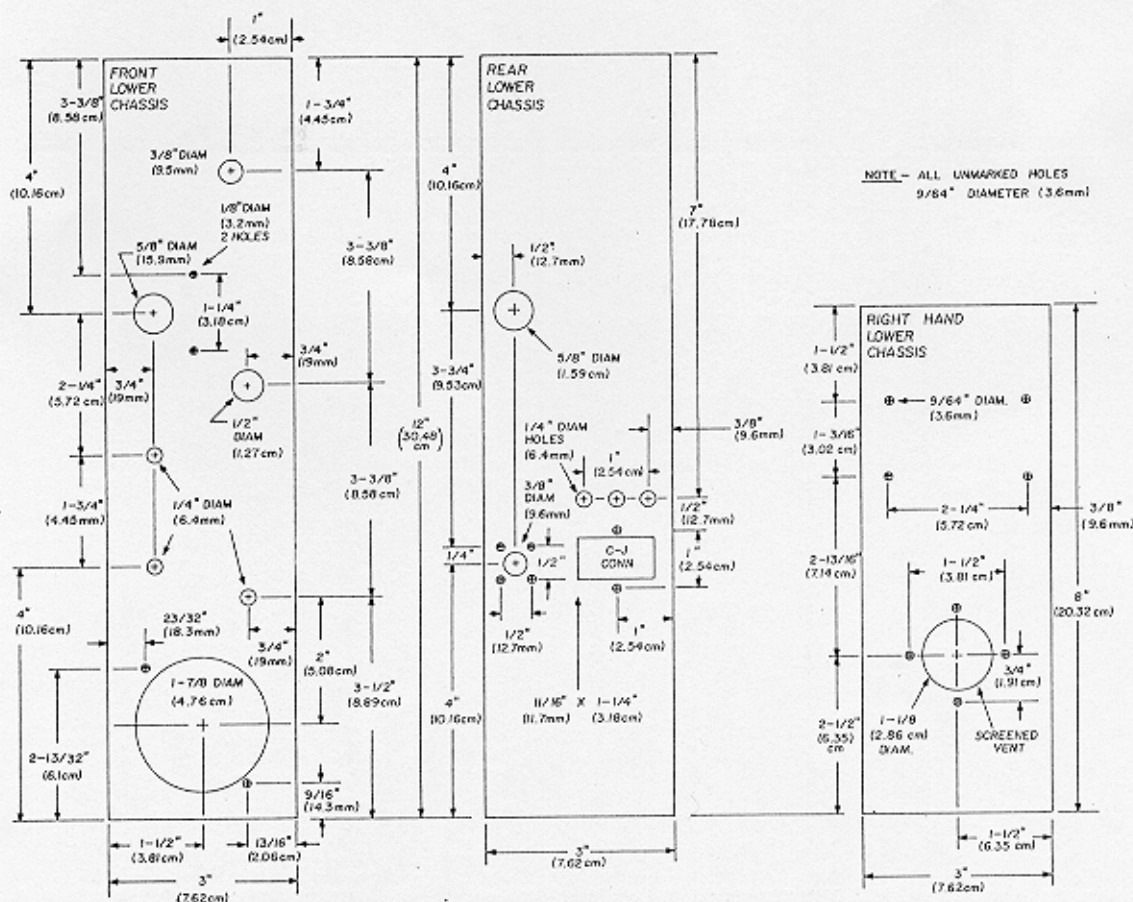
Layout of the front, rear, and right-hand side of the lower chassis (there are no holes in the left-hand side of the chassis). See fig. 7 for construction of the retaining ring for the screened vent. The meter hole in the front panel of the chassis is for a Calctro D10912 1 mA meter.
